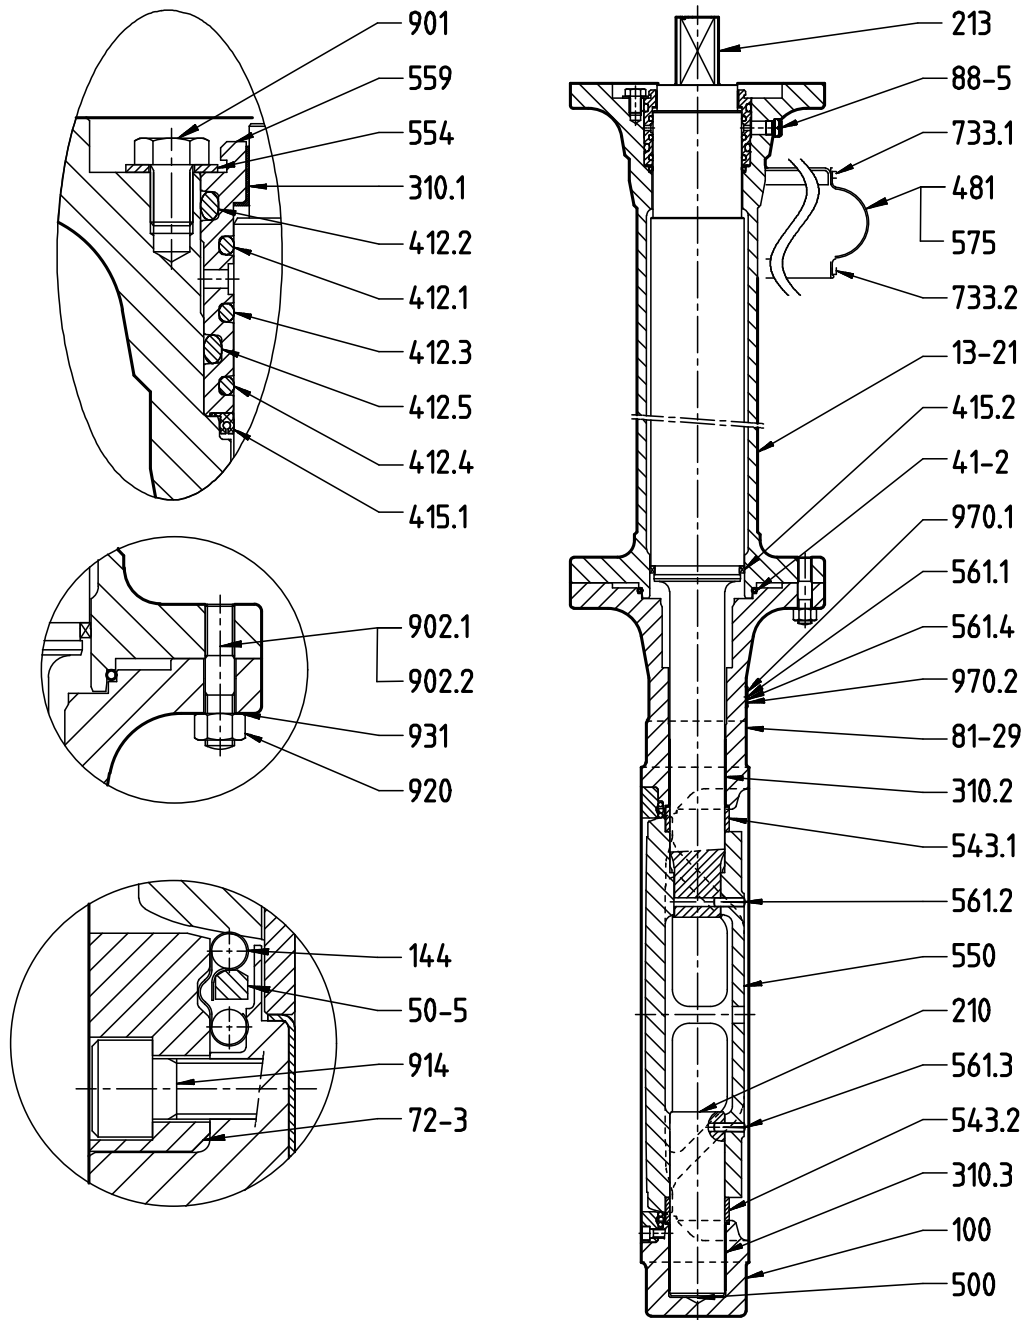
Sectional drawing of DANAIS CRYO AIR with metal seat DN 400-600 (16 - 24 inches)
